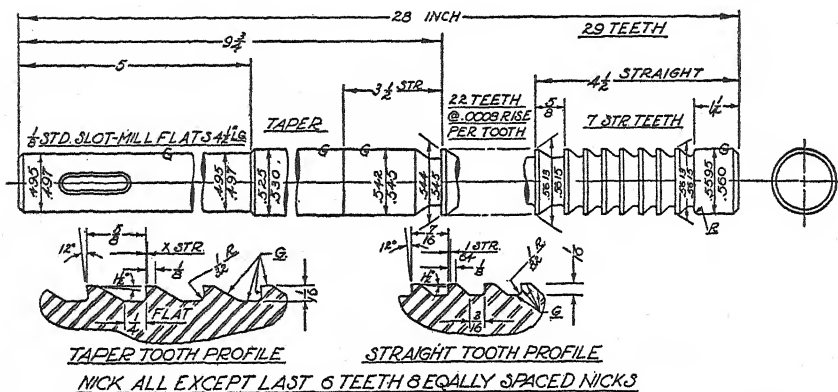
The Design of a High-Speed-Steel 0.752-In.-Dia. Round Finishing and Burnishing Broach of the Push Type for Use in Bronze.
